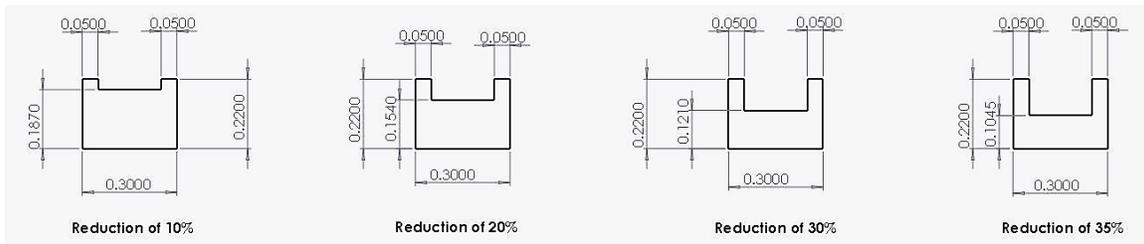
Geometrical design of the type-1 design with reduction in cross-sectional area
